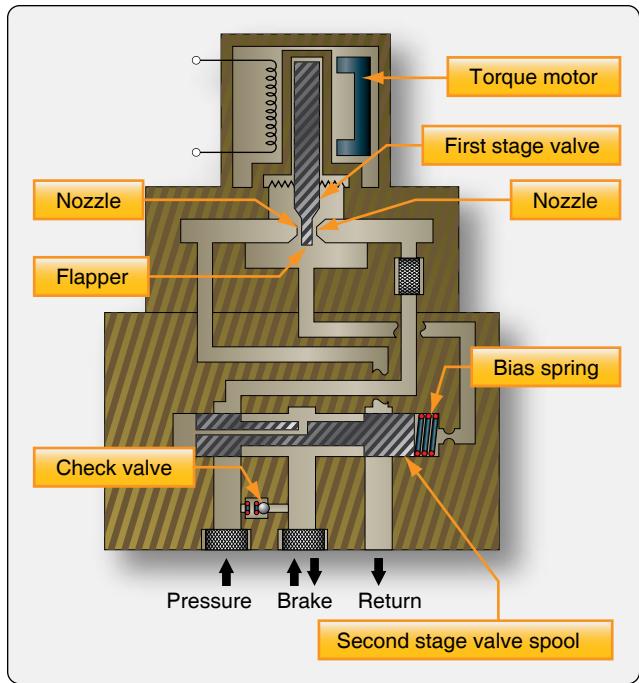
An anti-skid control valve uses a torque motor controlled flapper in the first stage of the valve to adjust pressure on a spool in the second stage of the valve to build or relieve pressure to the brake.
